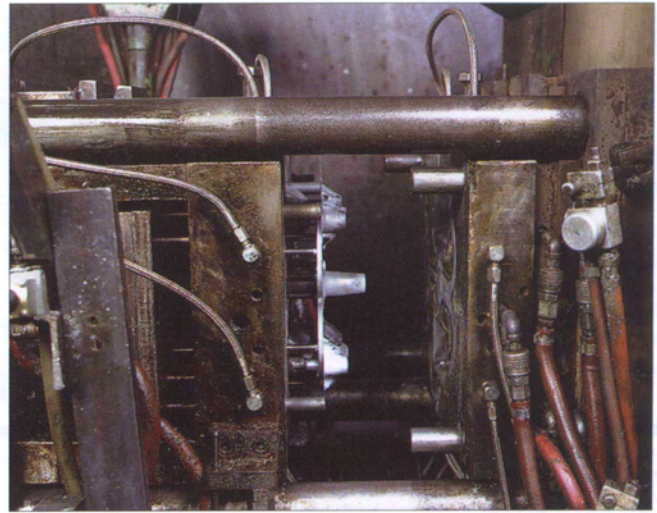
Die casting machine in open position. The zinc handle has been cast and is ready for the finishing and buffing that proceeds chrome plating.
